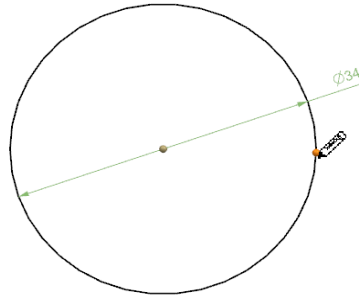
A circle drawn using the Circle by Center and Diameter method
